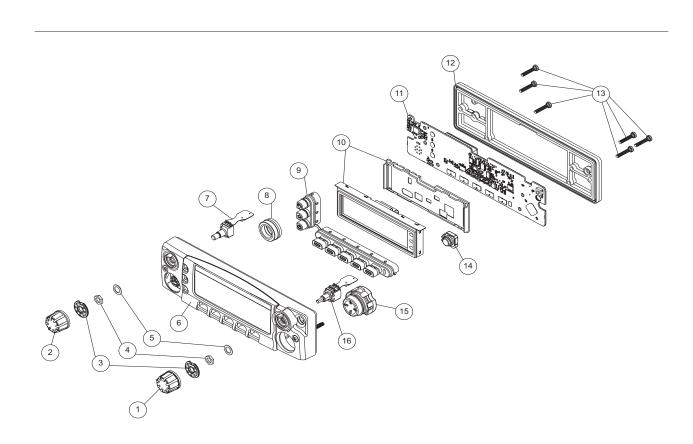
XTL 5000 O3 Control Head Exploded View
